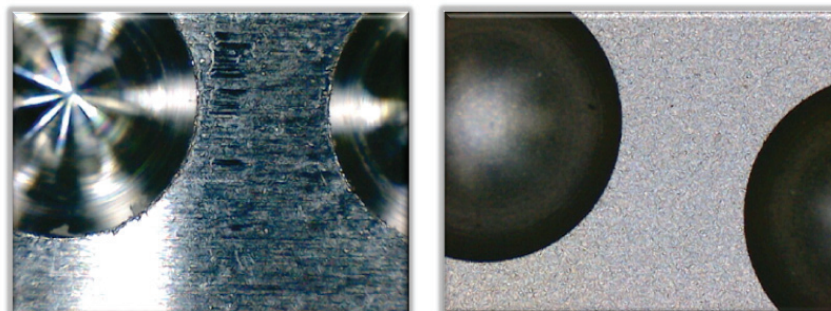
Typical surface textures: left machined surface, before tribo-treatment; right after tribo-treatment.
